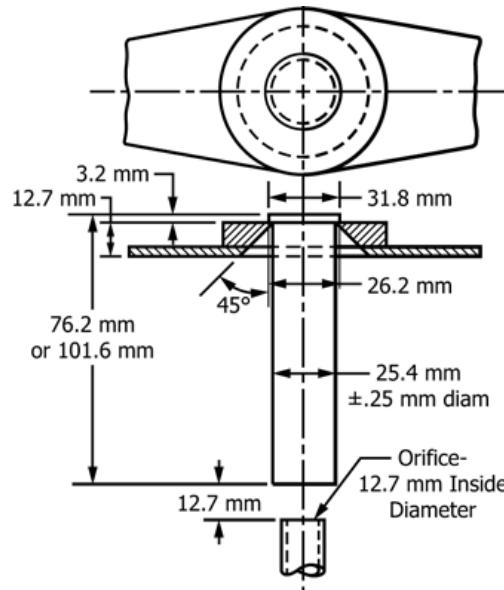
schematic indicating necessary dimensions for Jominy rig and test specimen from ASTM Handbook [34]
